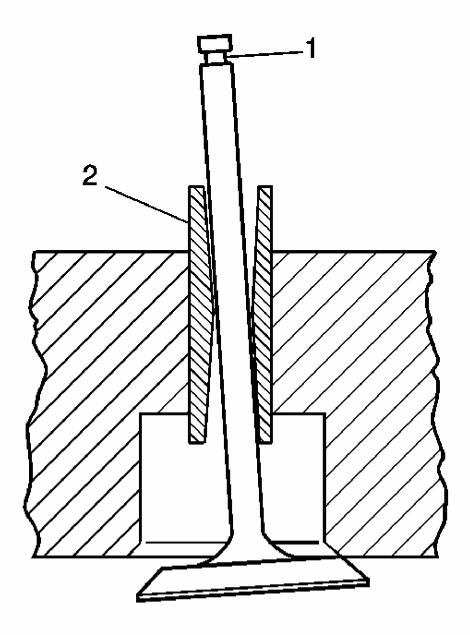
Inspecting For Excessive Valve Stem To Guide Clearance Courtesy of GENERAL MOTORS CORP.
